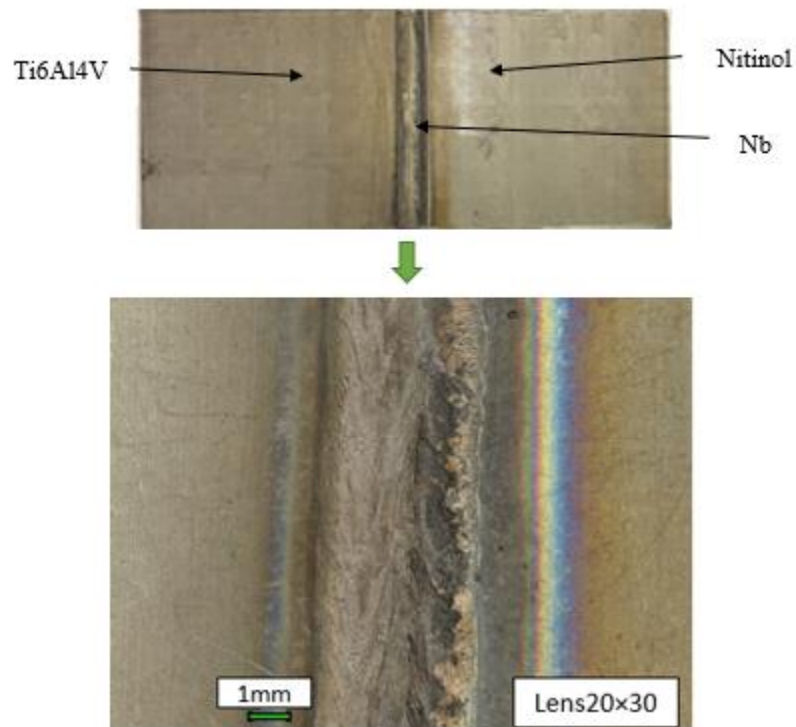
Welded samples with Niobium interlayer.
